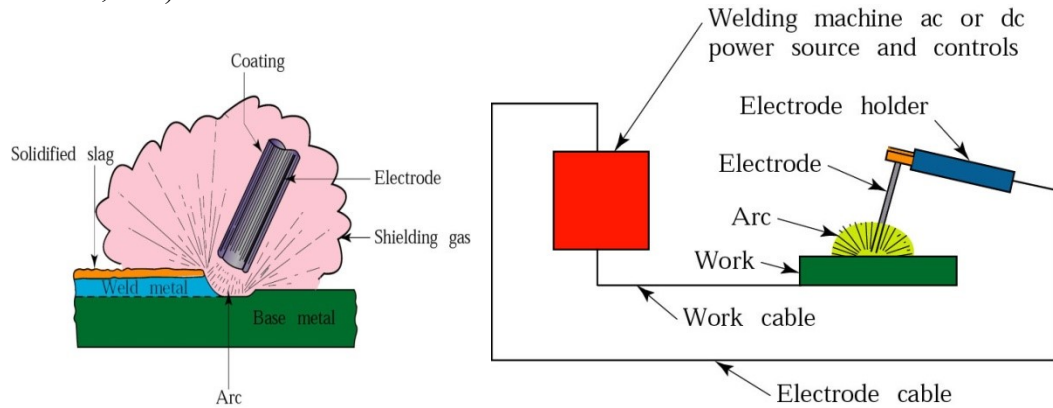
Schematic illustration of the shielded metal-arc welding operations, also known as stick welding, because the electrode is in the shape of a stick. (Väisänen 2013.)
